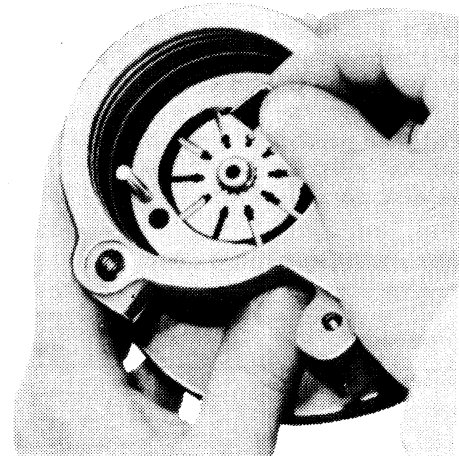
Remove The Cam Ring, Vanes And Rotor
